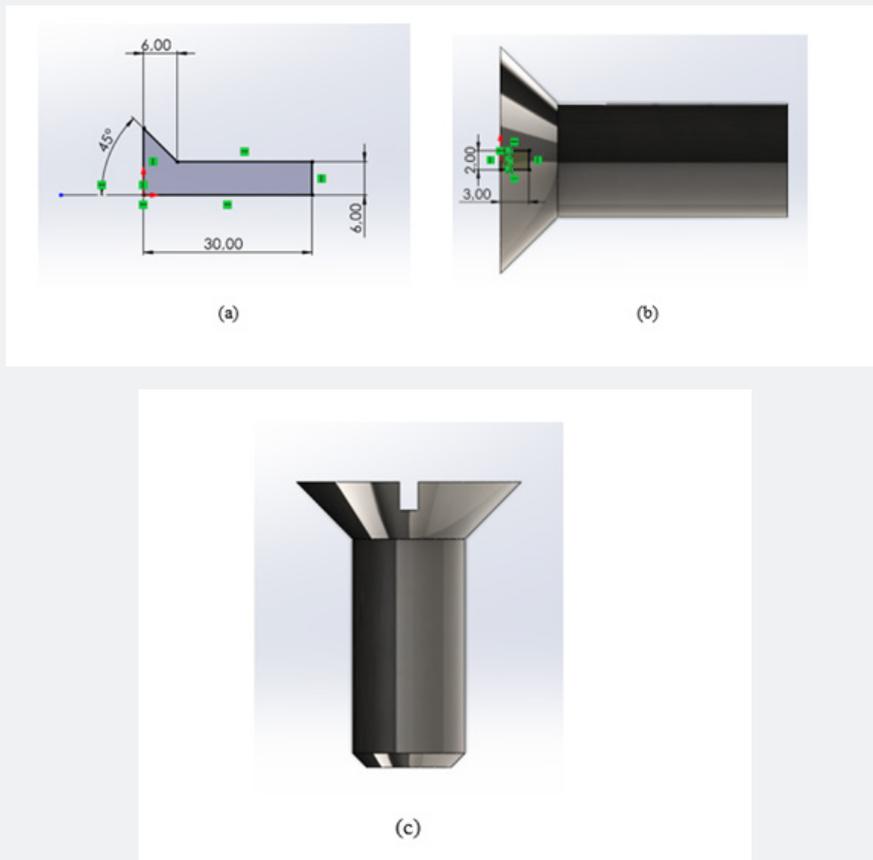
Screw (Part-6) design: (a) Dimensional 2D view, (b) (c) 3D CAD model.
